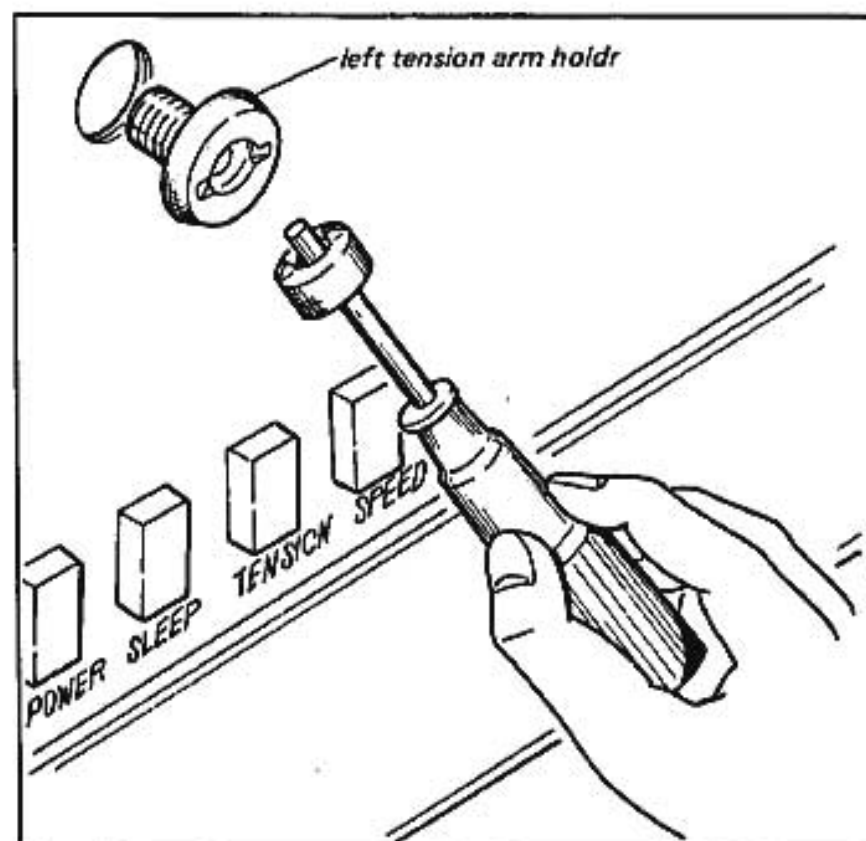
Screwdriver used for installing the left tension arm holder
